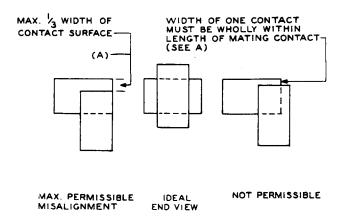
Alignment of Heavy Contacts—Plan View of Contact Surfaces 3.06 Contact Separation: With the bifurcated spring resting against the washer in its associated spacer assembly, the contact separation shall be
